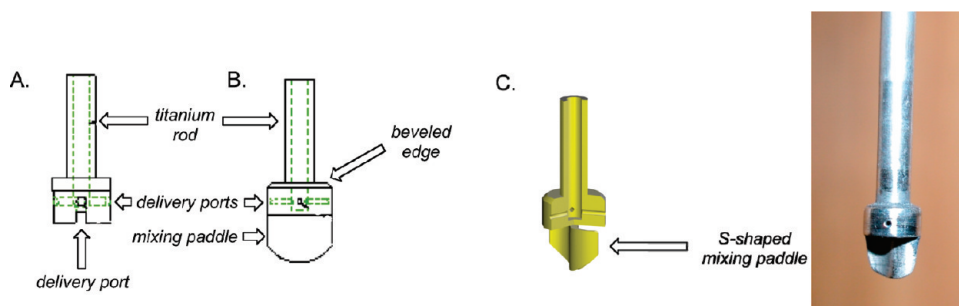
Several RINMR tip designs. (A) Intermediate design without mixing paddle. (B) Final design with mixing paddle. Note that the beveled edge allows for reseating inside the Kel-F sleeve. (C) Cutaway view of the final tip design and actual picture.
